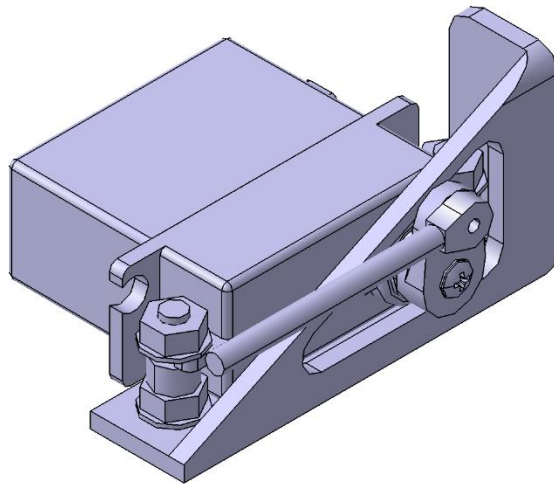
Typical Full Assembly of Volz DA 13-05-60 Servo Actuator with Fastener
